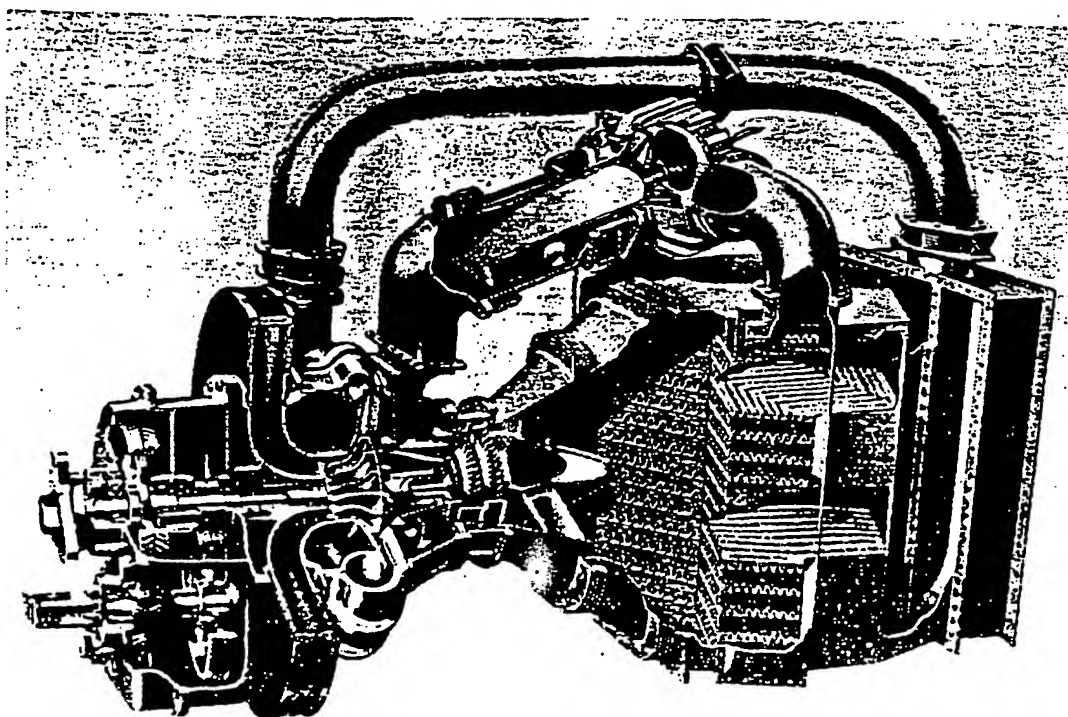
Austin 250 industrial gas turbine, with heat exchanger
